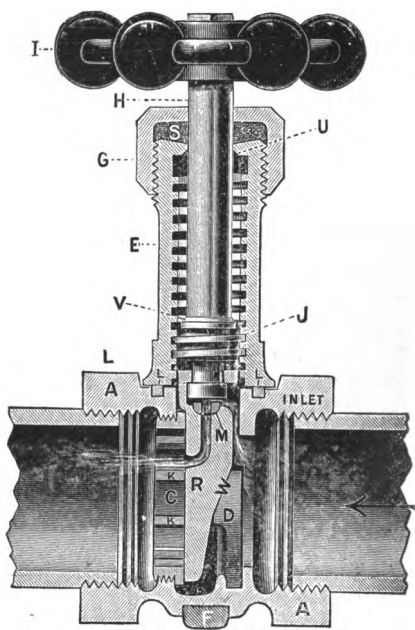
PLATE B. Sectional of Valve with By-pass open, and steam blowing through.
